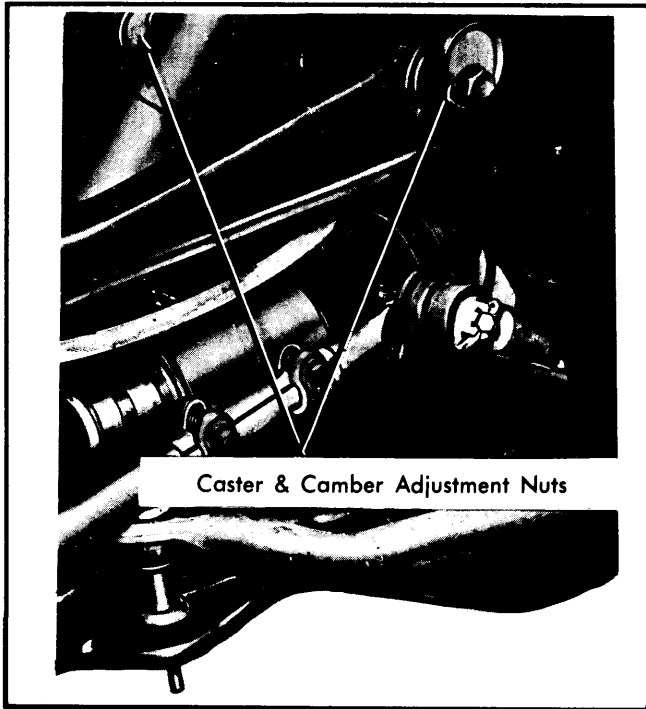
Eldorado & Seville Caster & Camber Cam Locations
